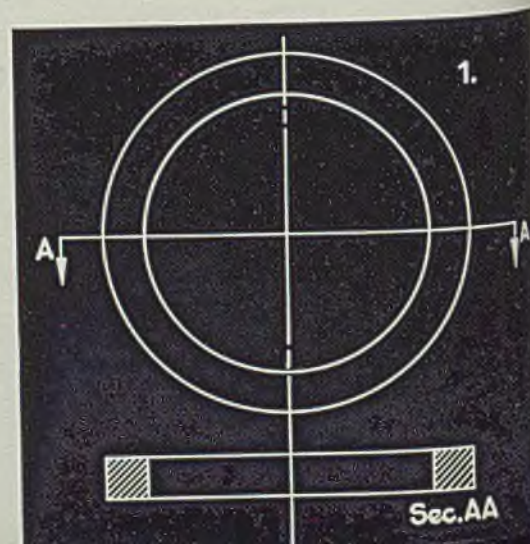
This cross-section sketch illustrates the change in mass involved in a spoked blank
